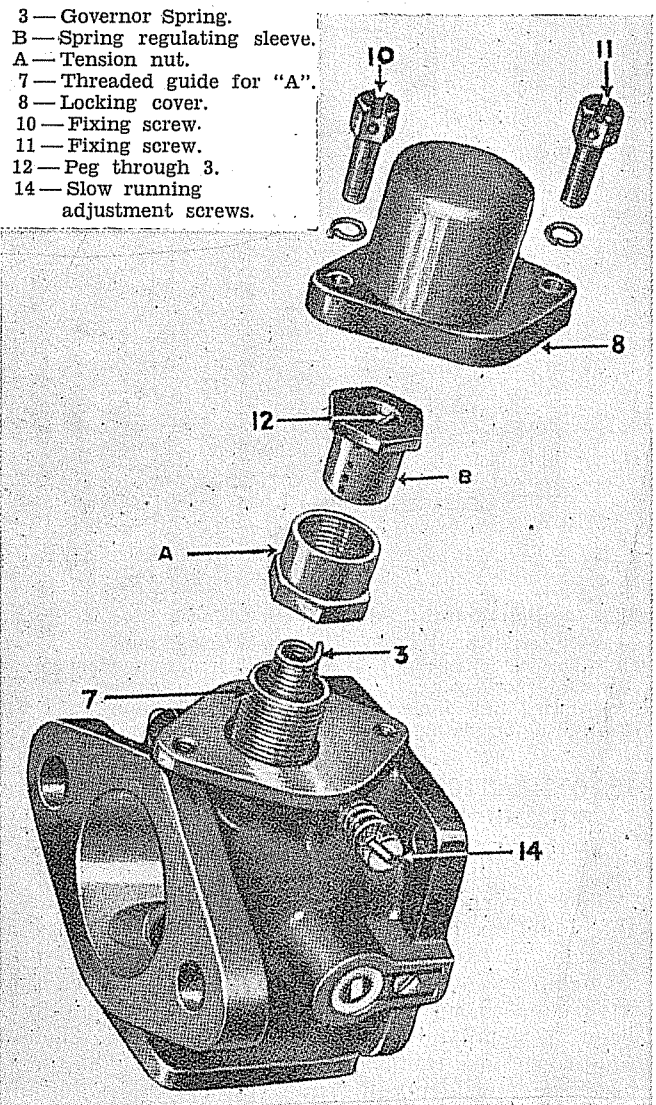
Exploded View of the Throttle Tube and its Component Parts.
